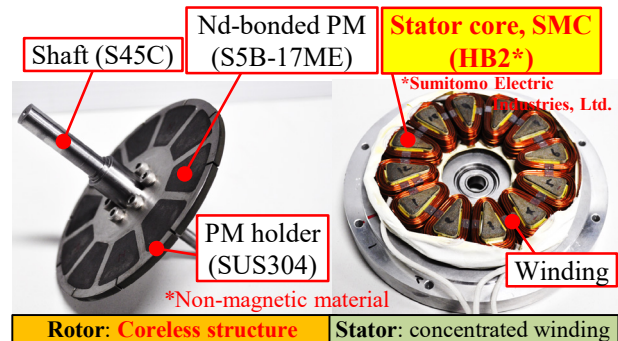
Appearance of the prototype using existing SMC for the stator core.
